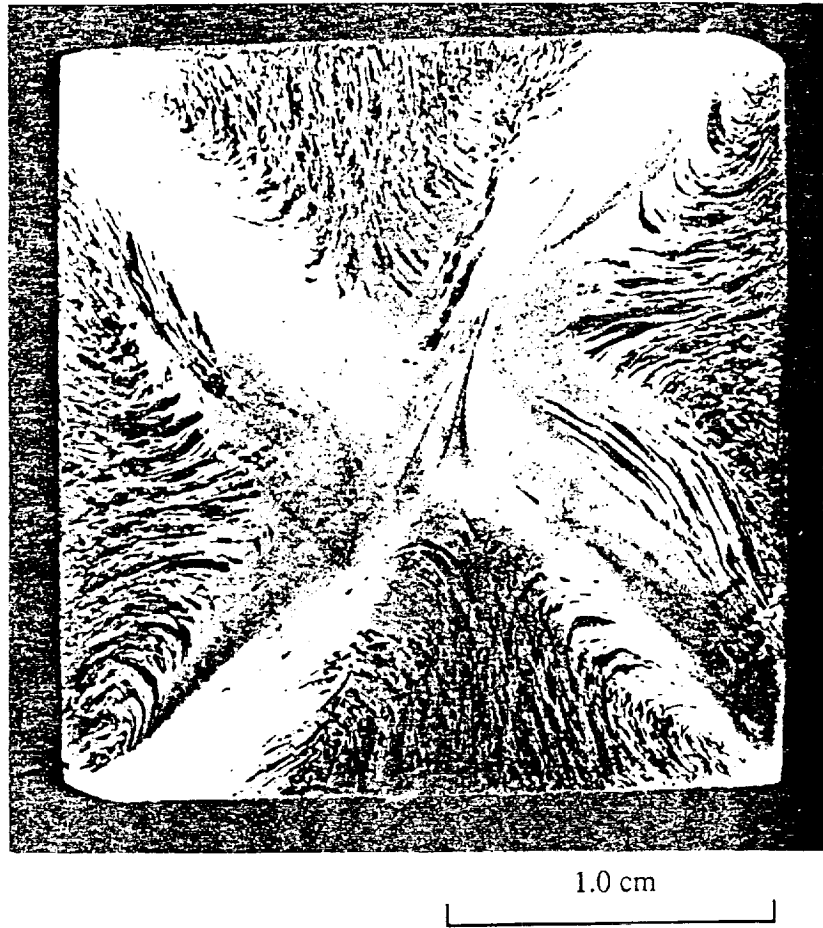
Macro-etched section of as-forged bar of prototype bearing steel.
